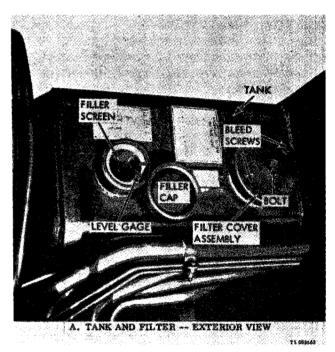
Dozer hydraulic system tank and filter. (sheet 1 of 2).
